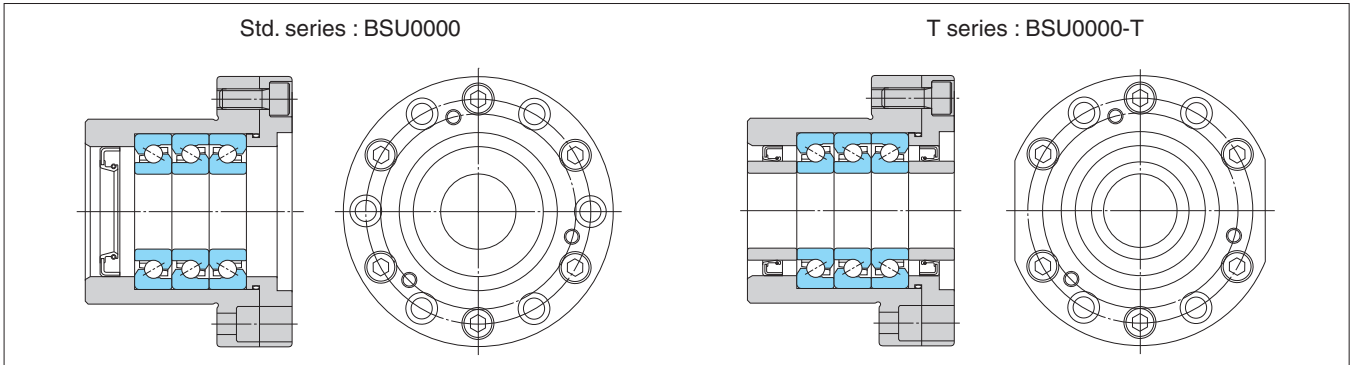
3 Series and structures of support bearing units for precision ball screws
